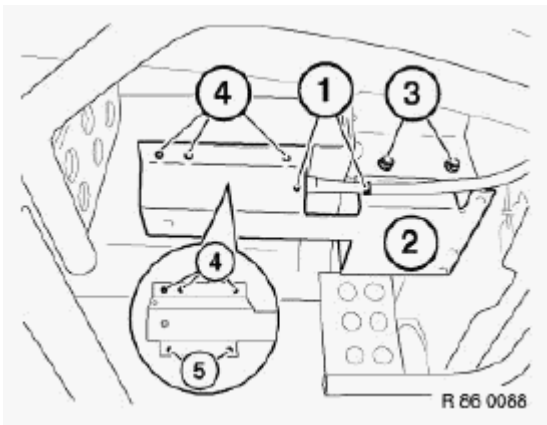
Identifying Cable Holders, Bracket, Screws & Rivets
